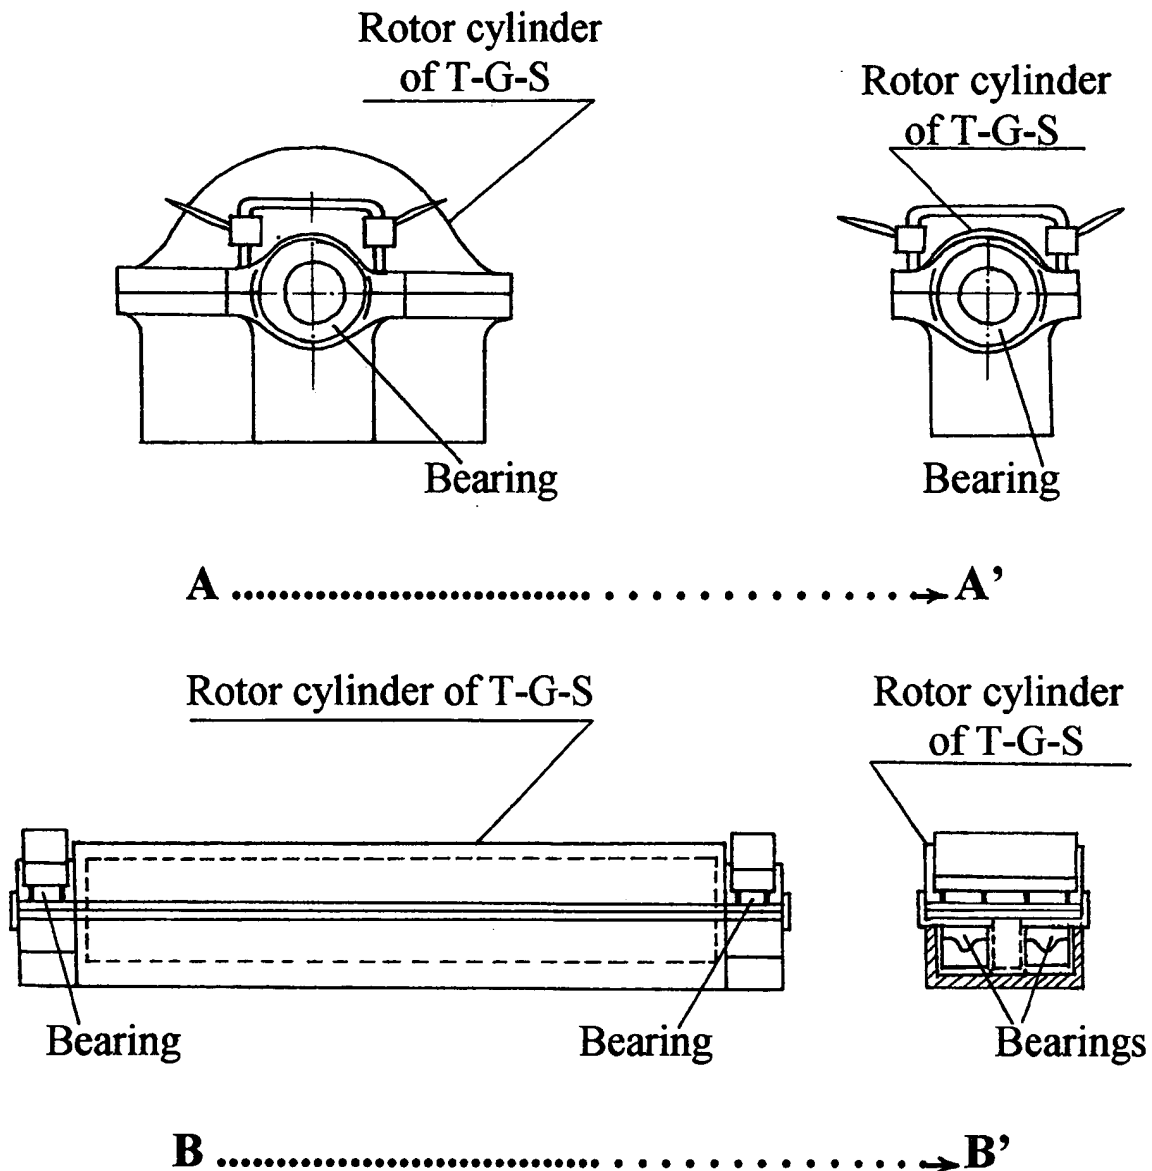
Correlations A' and B' -- in mutual dimensions and constructions -- between bearings and their related rotor cylinder for which the method of removal of vibrations may be used so, that the B-F-L-Ws will be installed already upon whole rotor cylinder.
